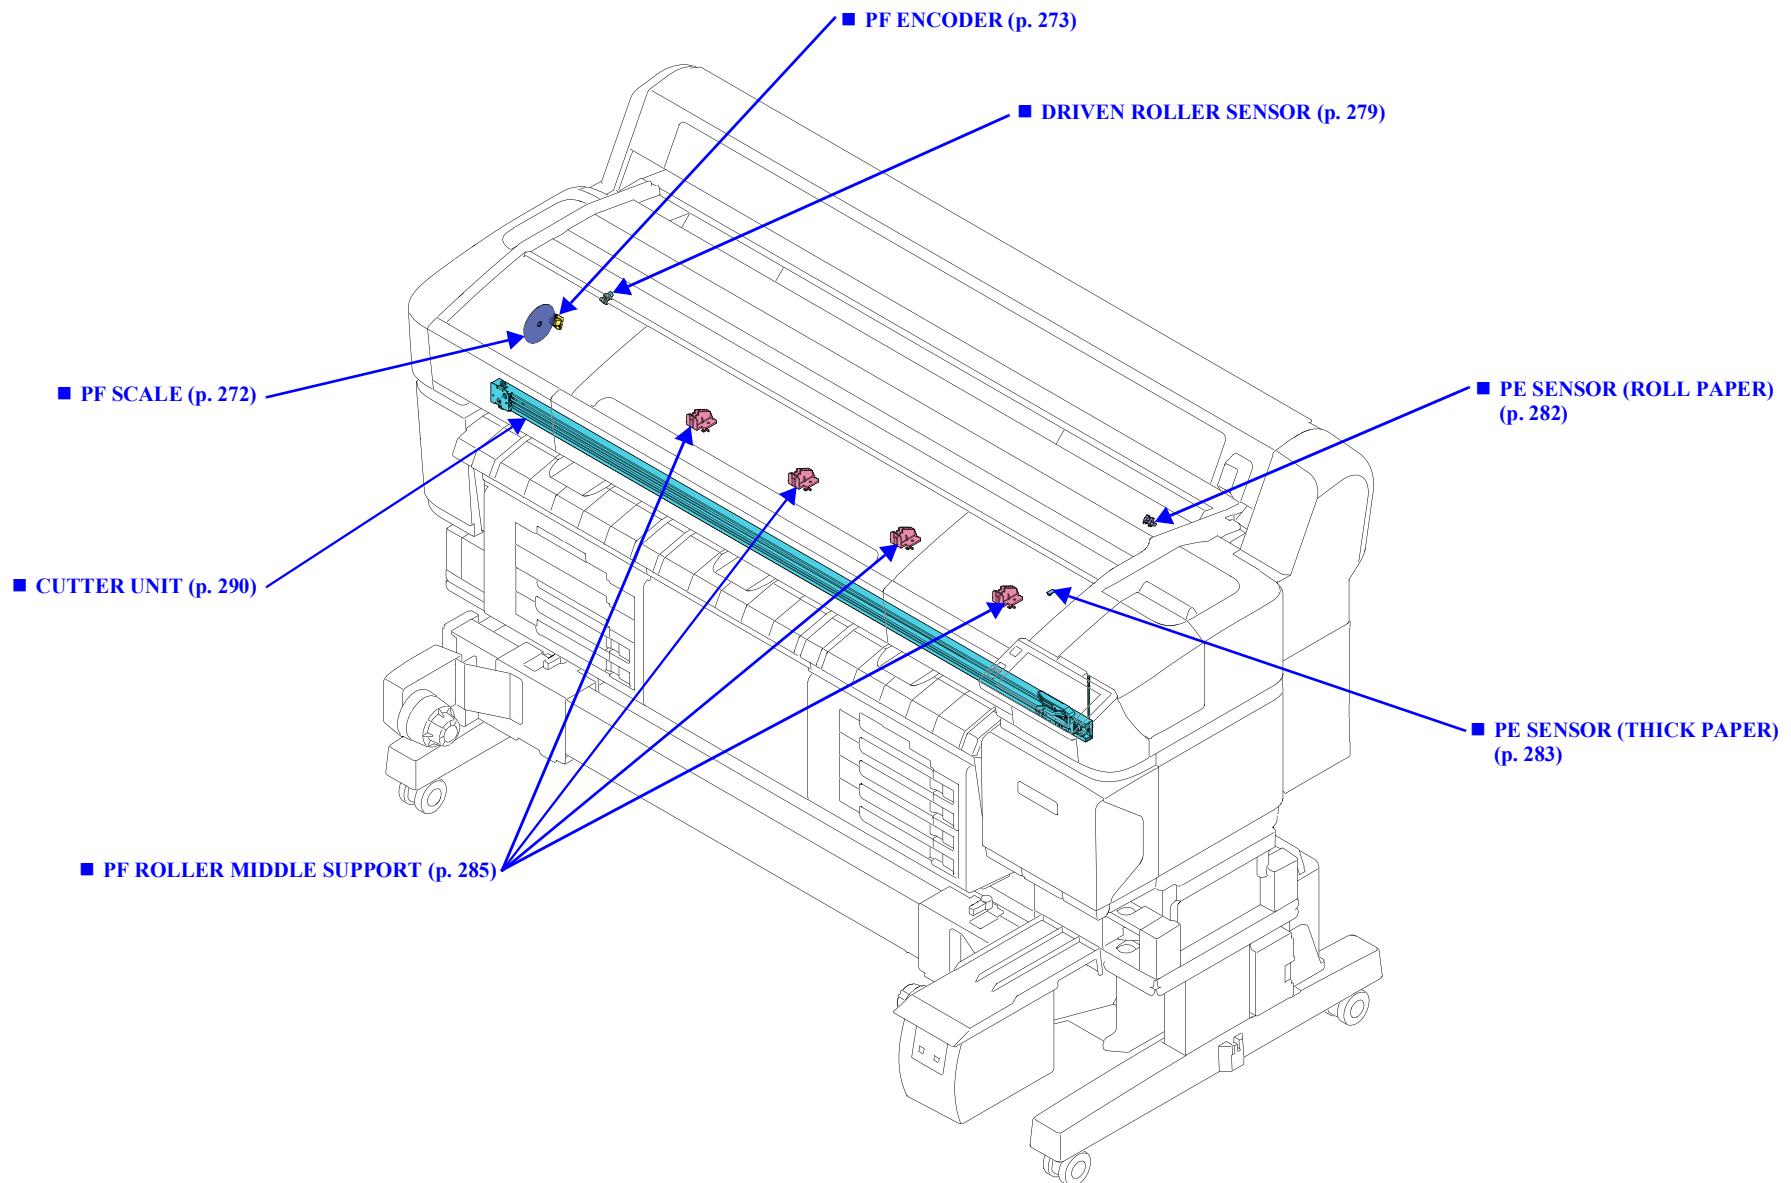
Paper Feed Mechanism / Cutter Mechanism
